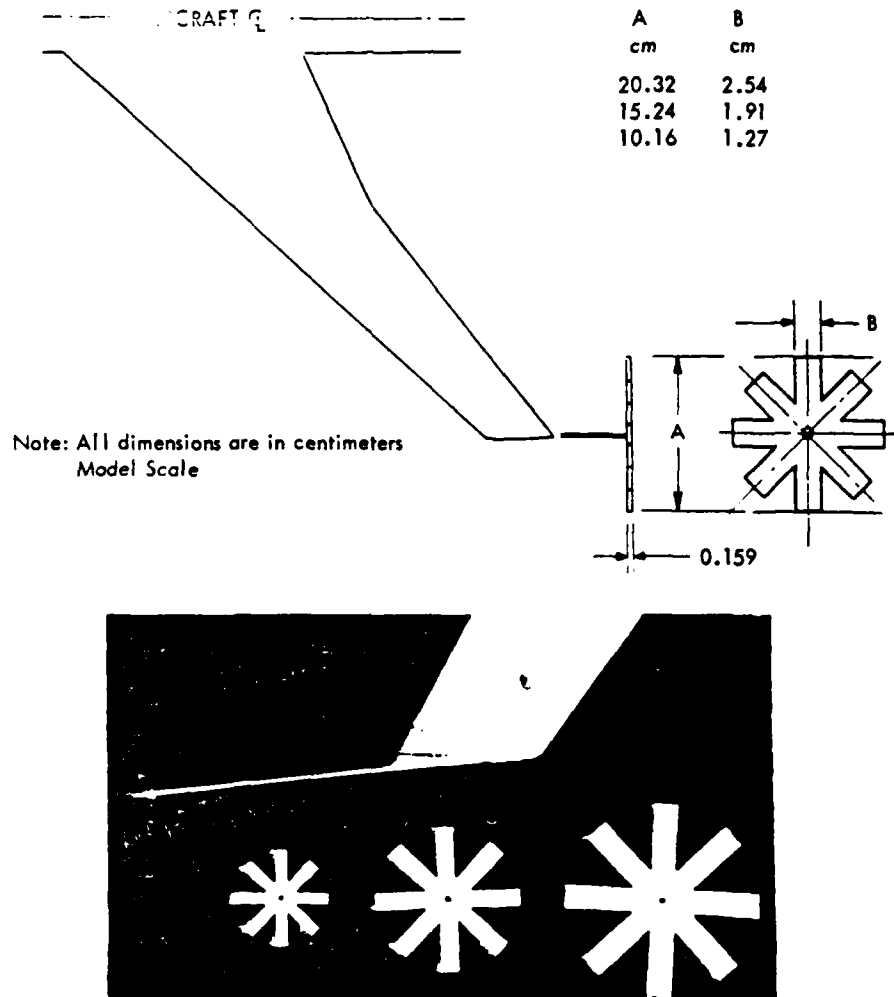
Sketch and Close-Up Views of Wingtip Mounted Splines [Ref. 27].
